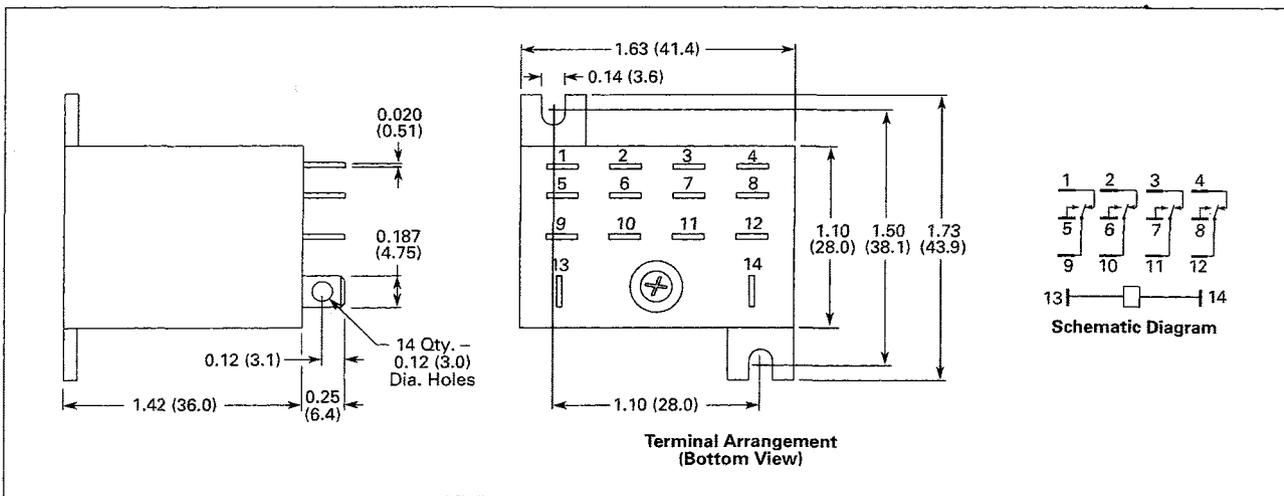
D7PR44 — Approximate Dimensions in Inches (mm)
